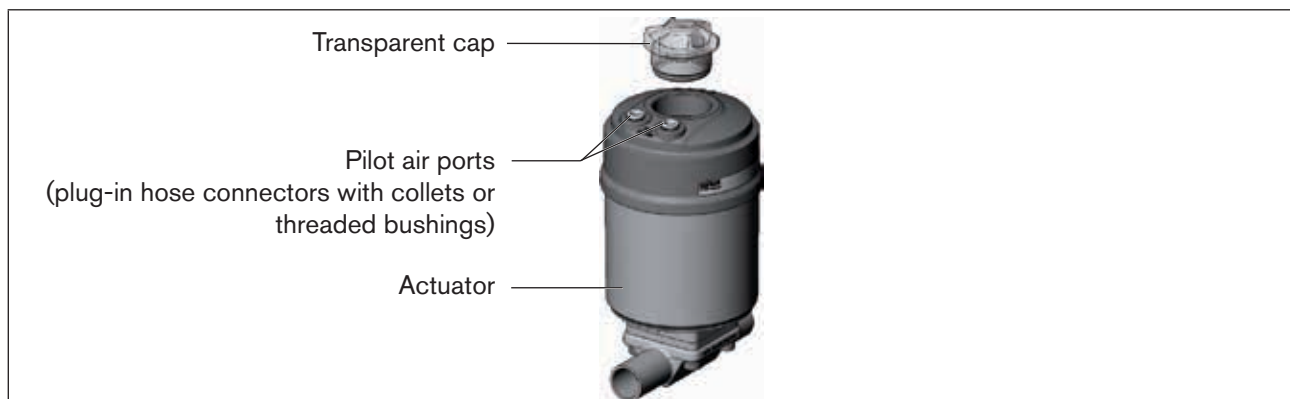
Installation of positioner, series 2103, 2300 and 2301
